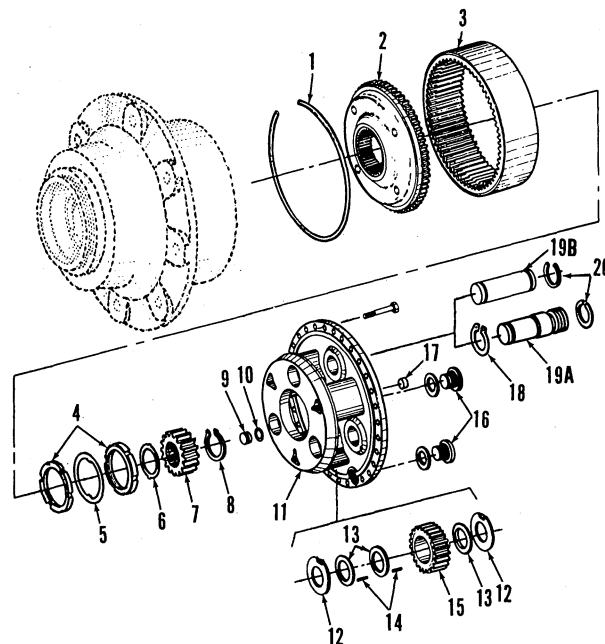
Exploded view of typical planetary drive assembly. Late models use planet pin (19A) with inside snap ring (18), and ring gear (3) and carrier (2) is a one-piece unit.
